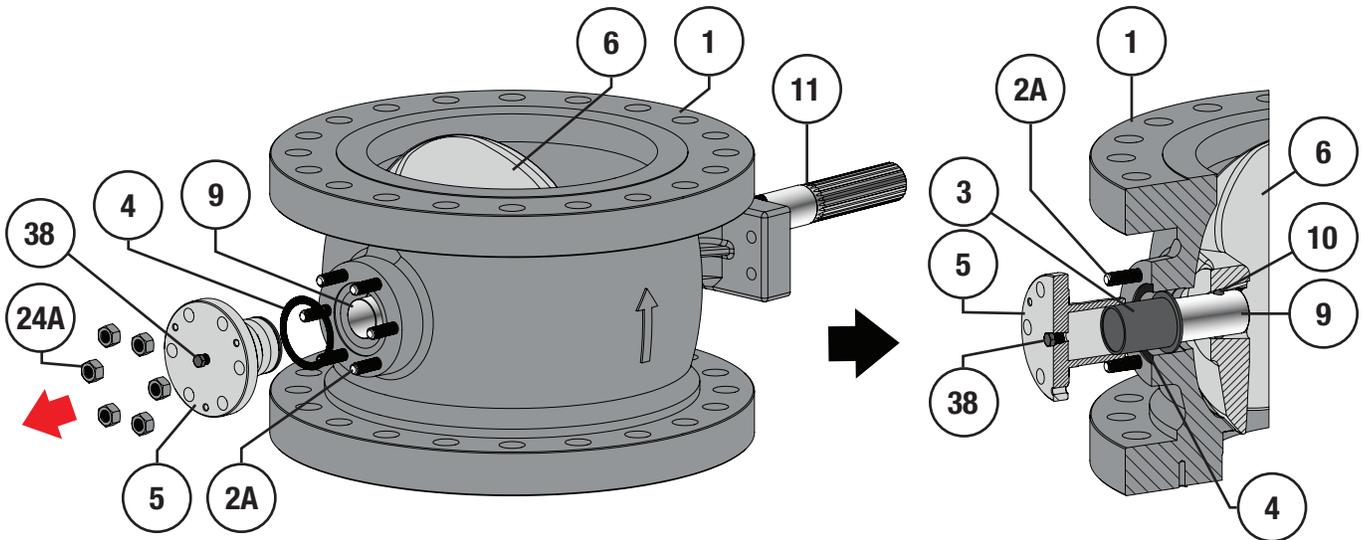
3 to 12" NPS (80 to 300 DN) Drive Shaft / Pipe Plug Removal
